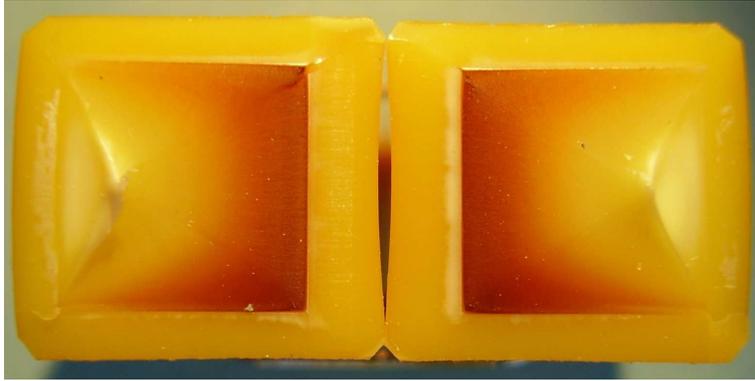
Fracture surface of a FNCT-specimen taken from a PA 12-pipe (8 N/mm<sup>2</sup>)
